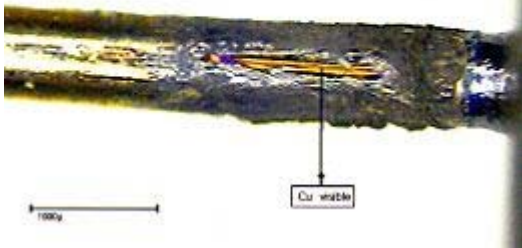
Lead Wire Ø0.8mm, FeNiCuSn, Welding not ok, Welding Temperature too high, Thermal Conductivity of the Lead too low, Sn Coating gets burned, Copper Core visible
